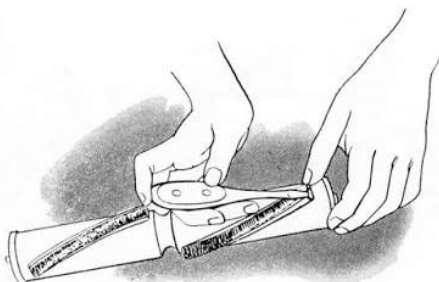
To remove brush on Models 60-61, press latch outward and up until it catches
